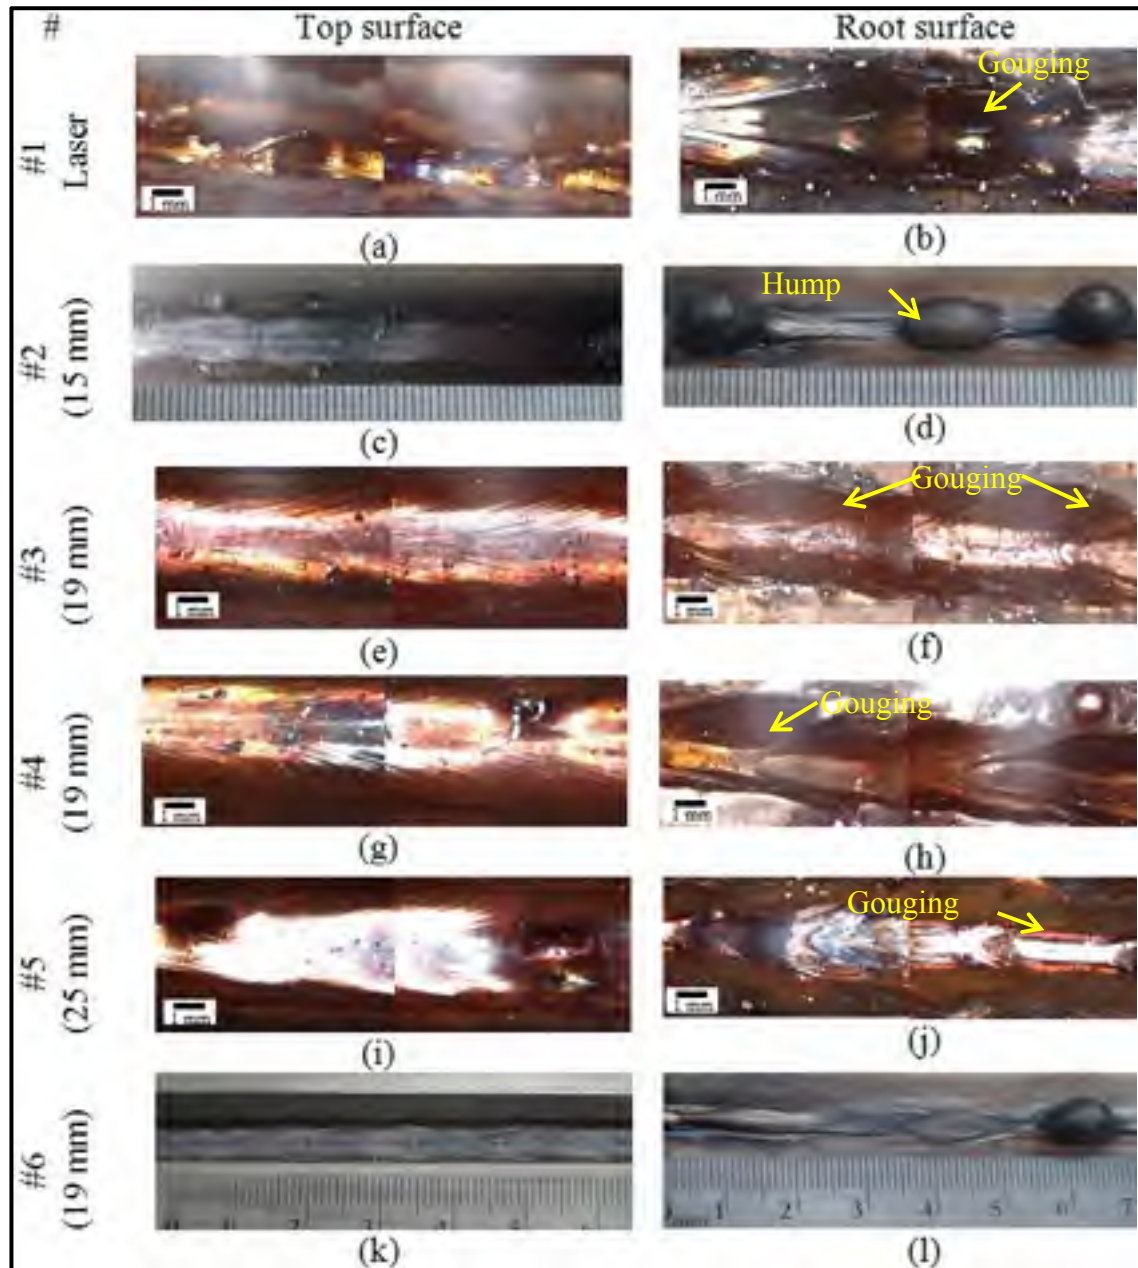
Weld root surfaces at different laser powers, and hybrid or tandem laser-arc welding
